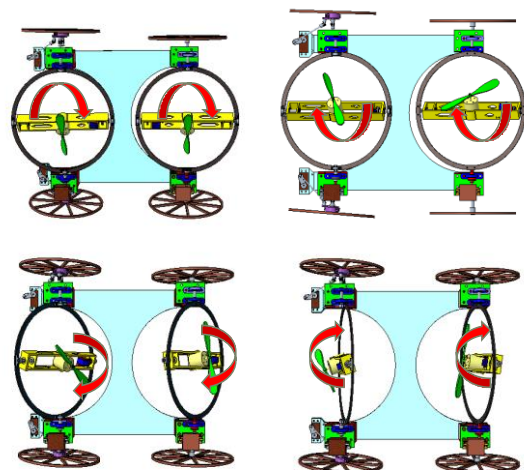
Schematic diagram of front, rear, left and right propeller head rotation
